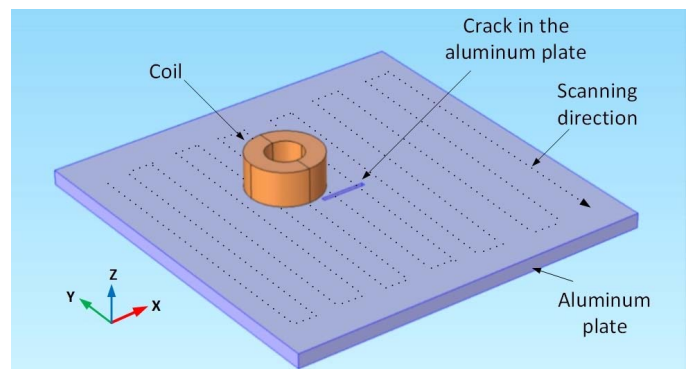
View of a 3-D model multi-turn coil and its path over an aluminum plate with a defect.
